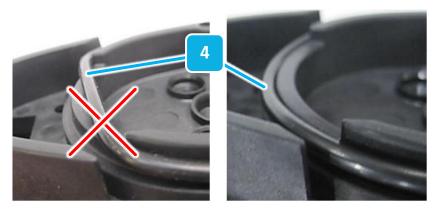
Huber + Suhner charging plug connector face CCS1, sealing ring
